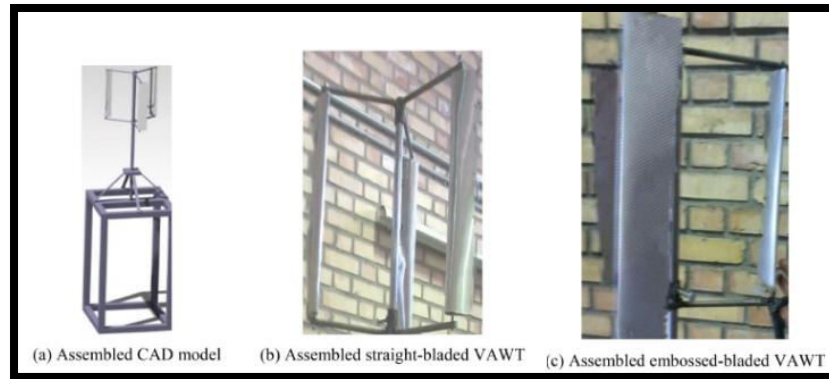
(a) Assembled CAD model (b) Assembled straight-bladed VAWT (c) Assembled embossed bladed VAWT (Davari et. al. (2024))
